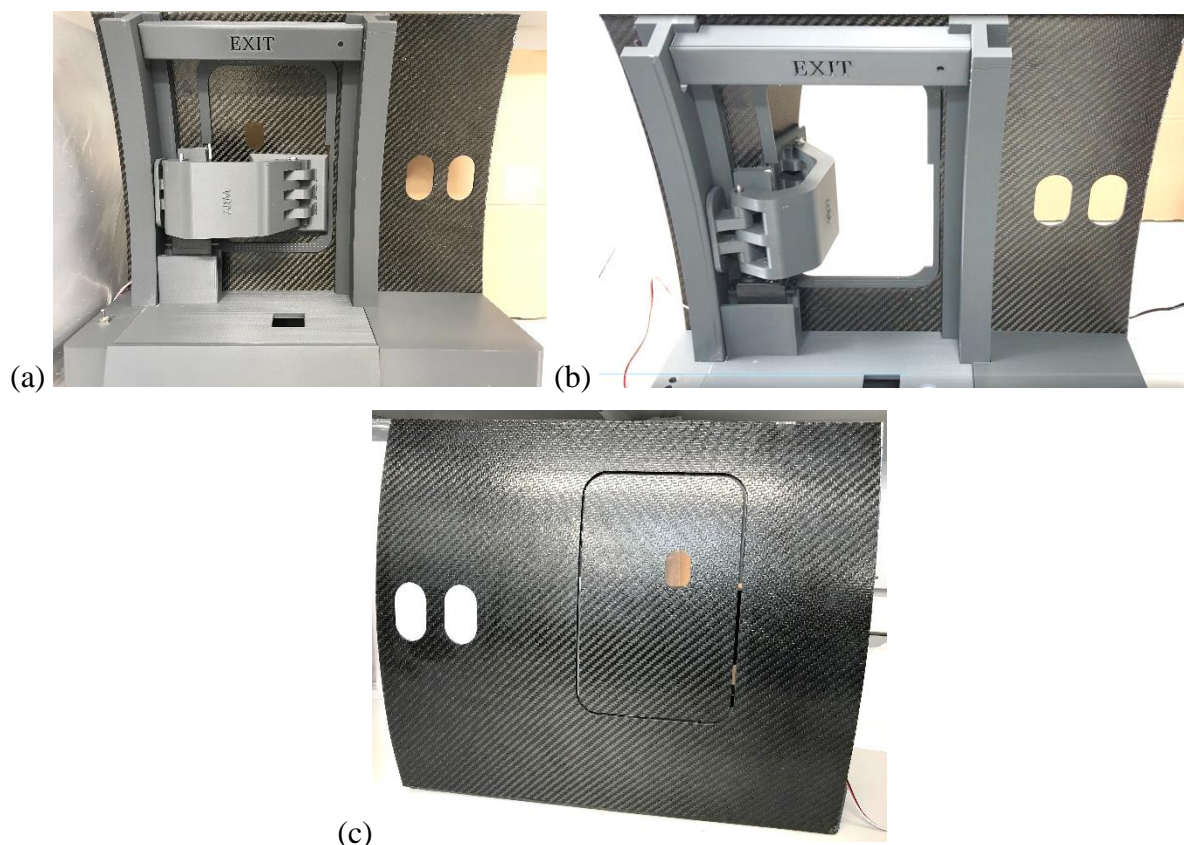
Scaled fuselage door assembly (a) inside view with the door closed (b) inside view with the door open (c) outside view.
